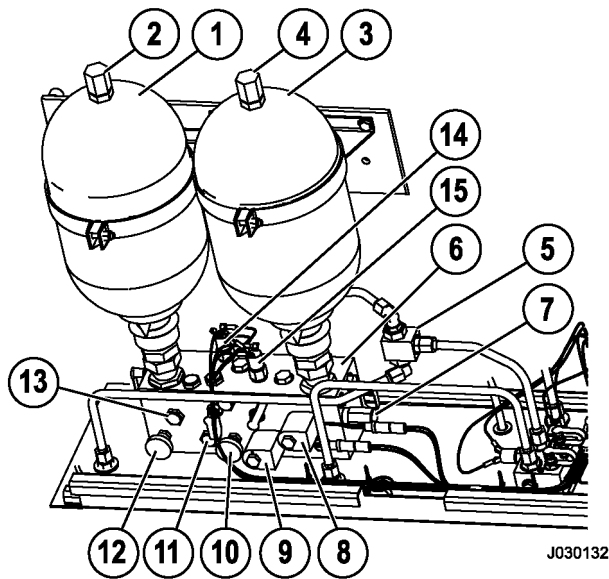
ACCUMULATORS AND BRAKE MANIFOLD
